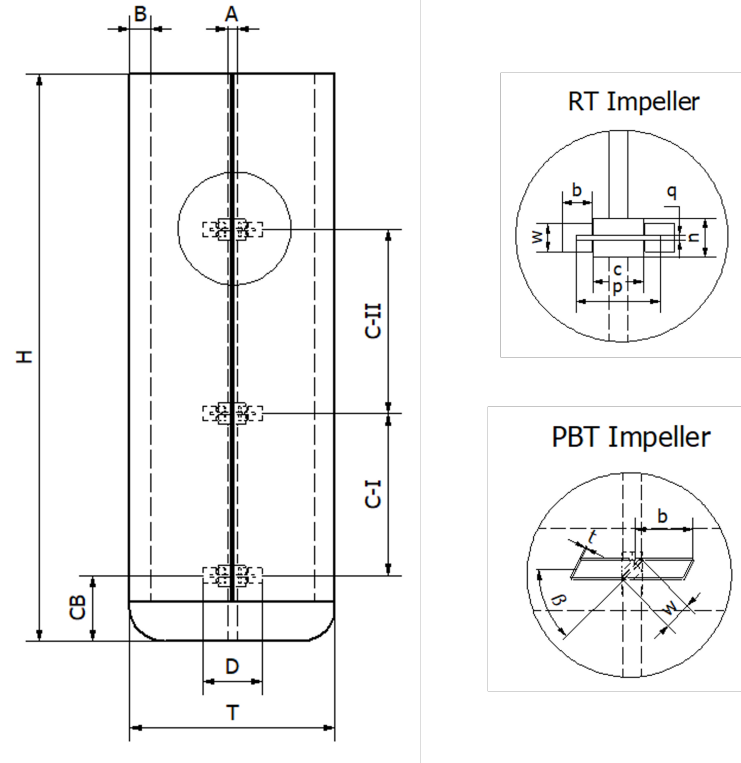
Sketch of the 0.7 m³ reactor geometry. Details about the dimensions are presented in Table 4.
